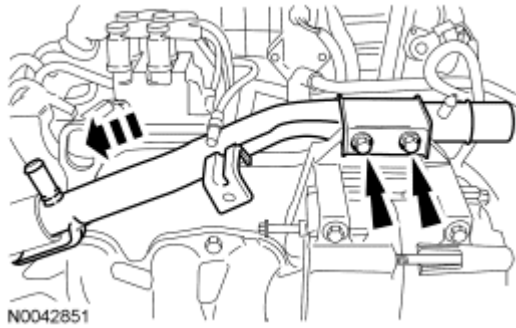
Identifying Generator & Support Bracket Assembly
